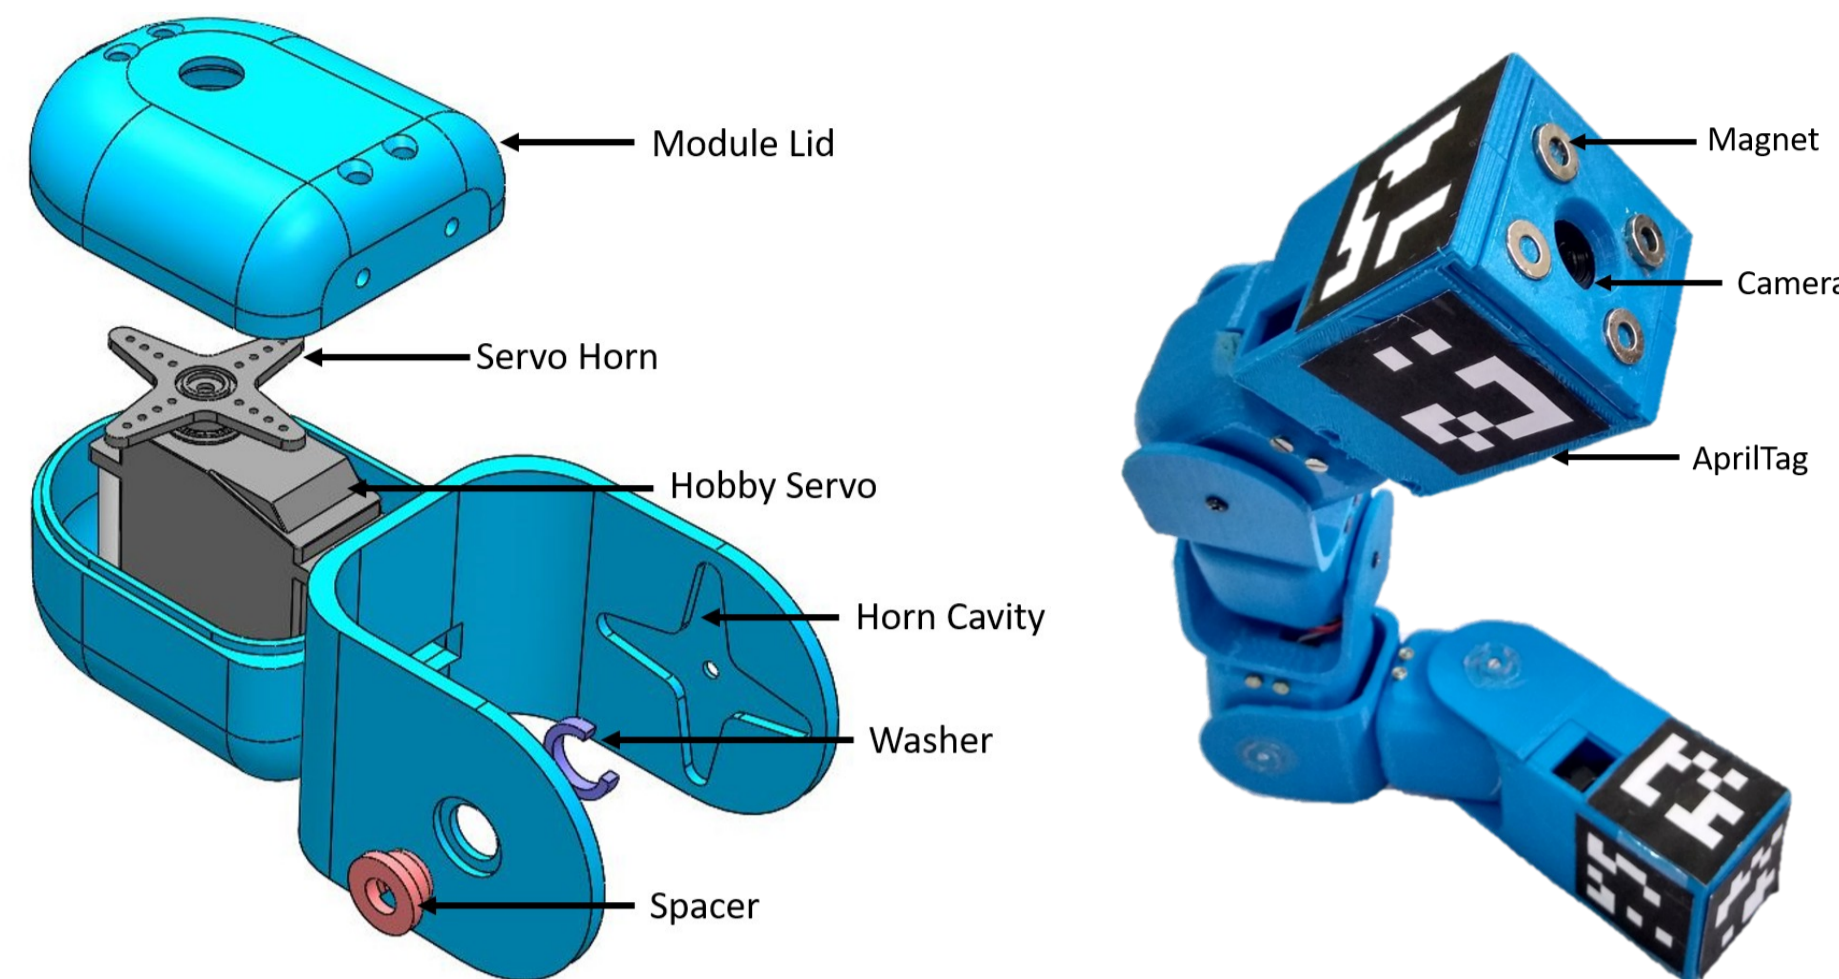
(a): Exploded view of module (left) and fabricated snake robot(right)
